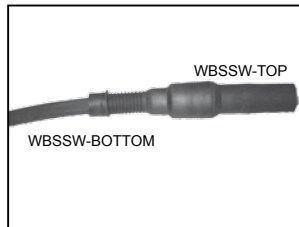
Push back the bottom part of the WBSSW. Slightly push the bottom of sleeve forward onto the top part until you hear and feel the snap seal over the second rib of the bottom part
